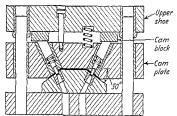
Cam-piercing die design for movable cams integral with punch holder. (Design Service Co.)
